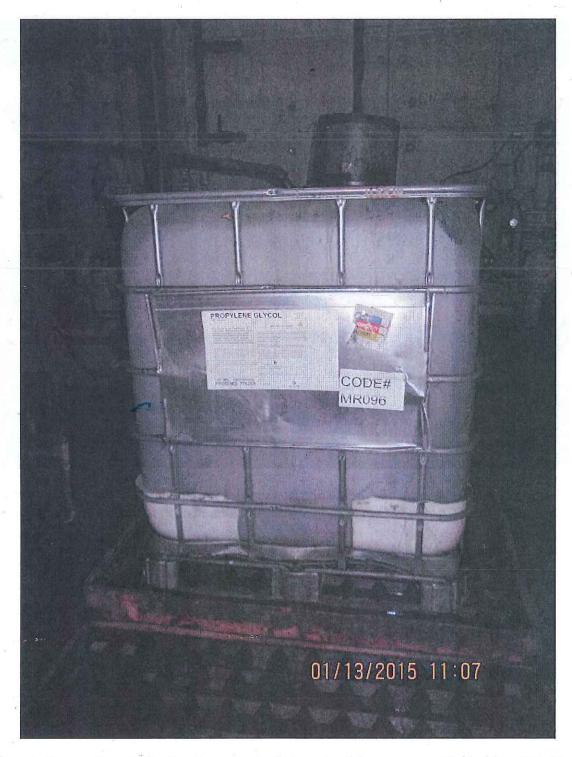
A tote of used oil collecting quench oil from the Allcase furnaces in Building 303. The tote was not labeled as "Used Oil."
